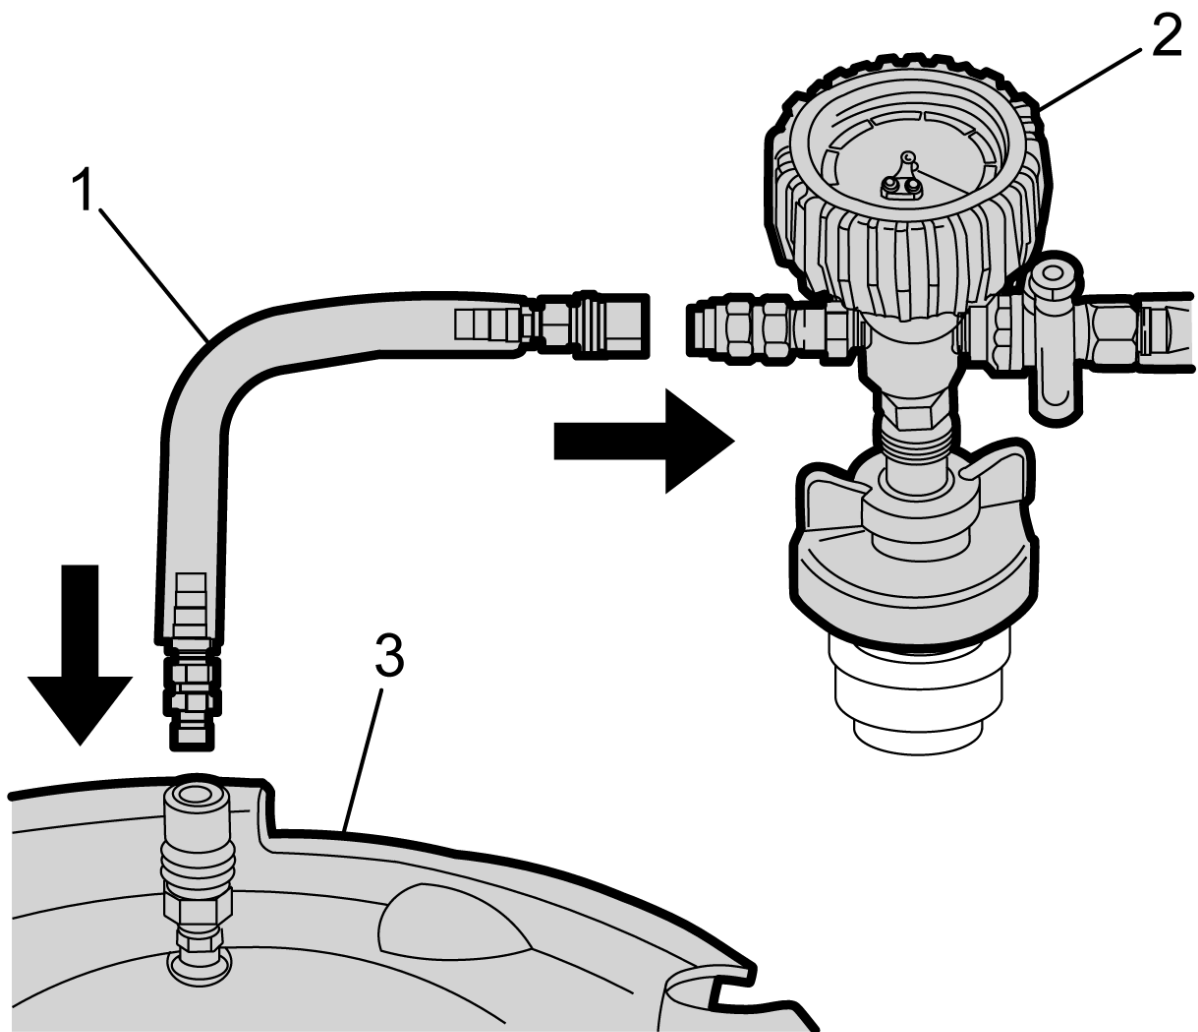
Vacuum Hose, Gauge Assembly & Tank
